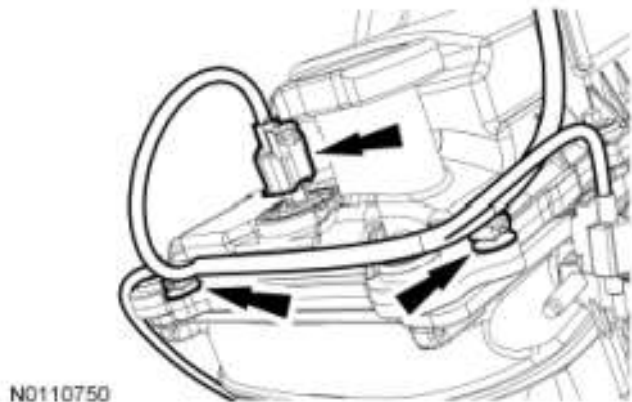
Locating RH Variable Camshaft Timing (VCT) System Oil Control Solenoid Electrical Connector And Wiring Harness Retainers
